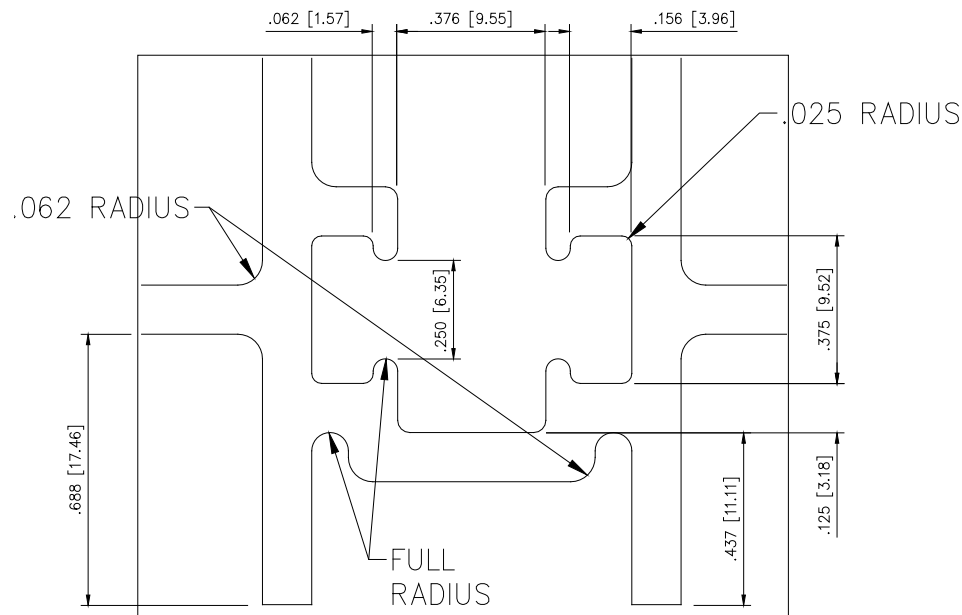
AAMA Die Profile Drawing for Poured & Debridged and Mechanically Crimped In Place Test Cavities
